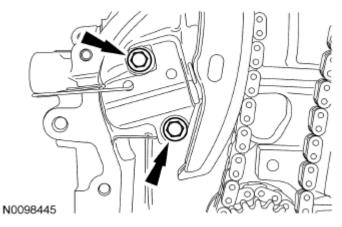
Locating Timing Chain Tensioner Bolts Courtesy of FORD MOTOR CO.
